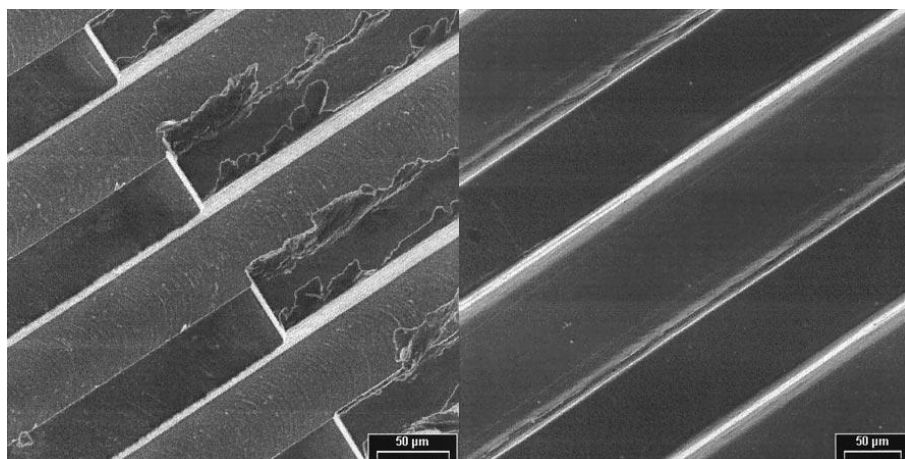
Microgrooves on brass material with burr partly removed (left) and stainless steel after deburring (right)(Schaller, 1999)
